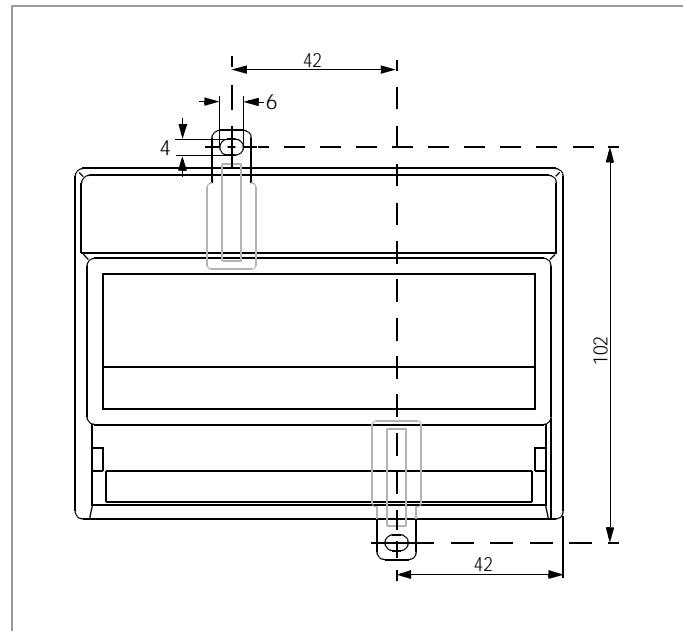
Dimensional Drawing for Wall Mounting (front view)
